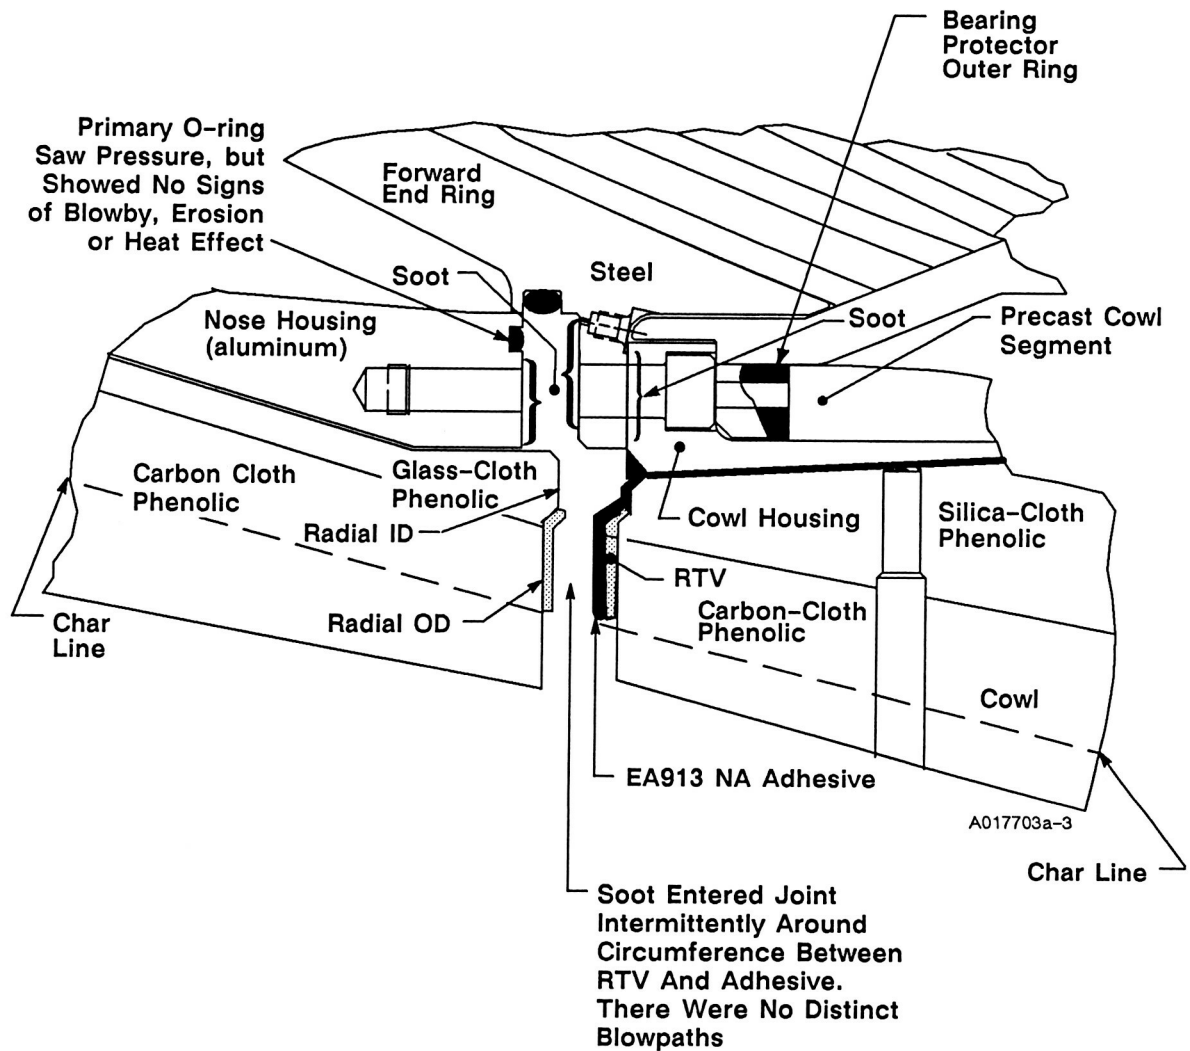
STS-27B Nose Inlet Housing/Flex Bearing Joint
